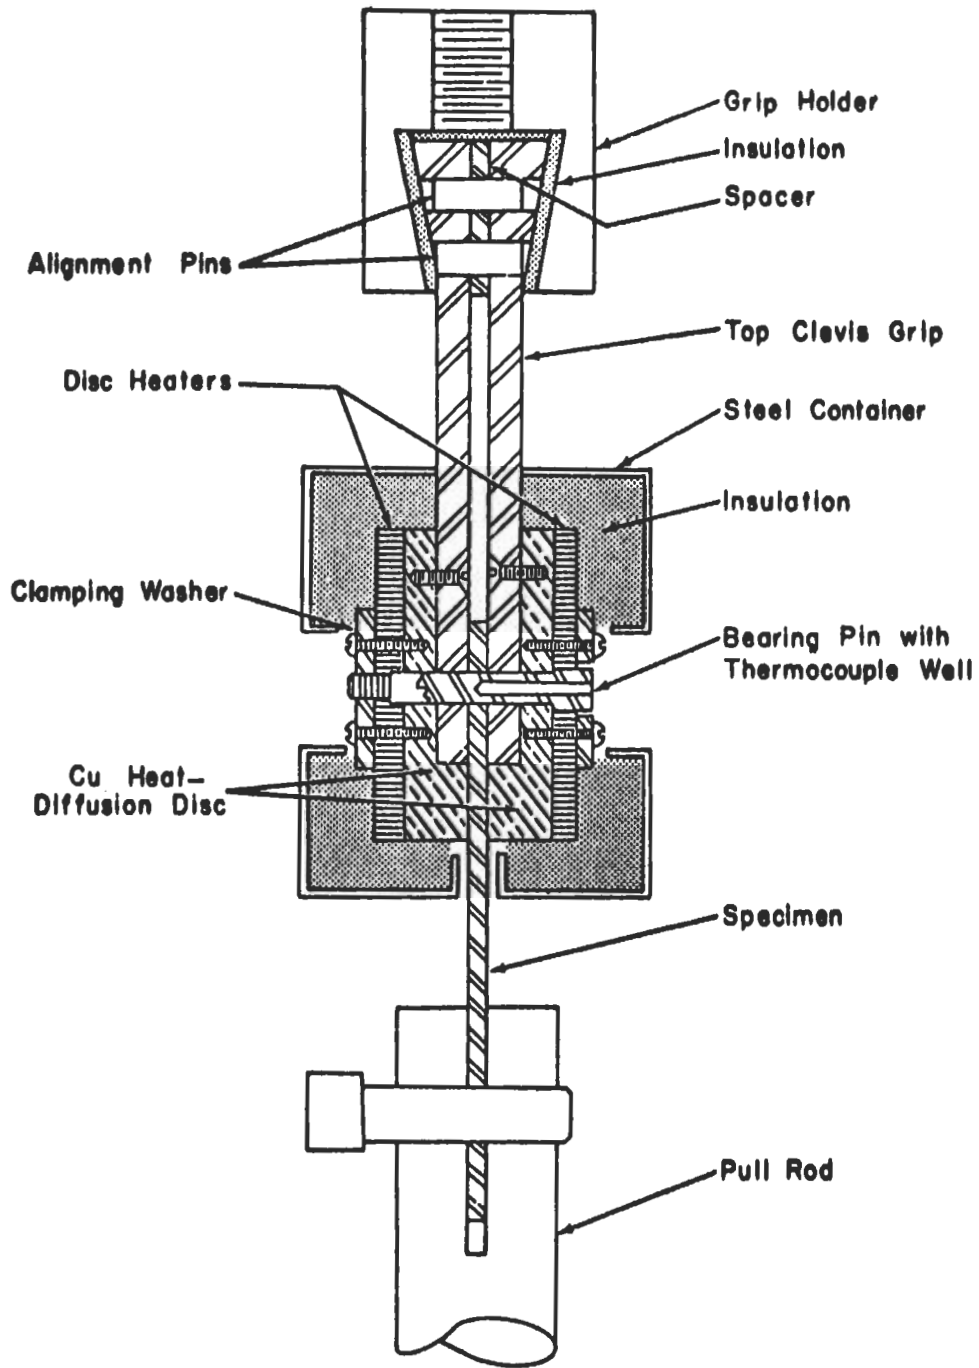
CROSS-SECTION OF BEARING CREEP-RUPTURE FIXTURE
